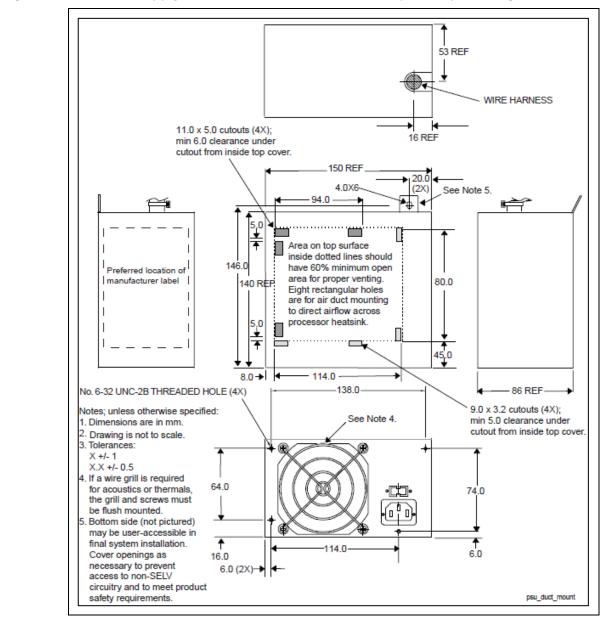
Power Supply Dimensions for Chassis that Require Top Venting
